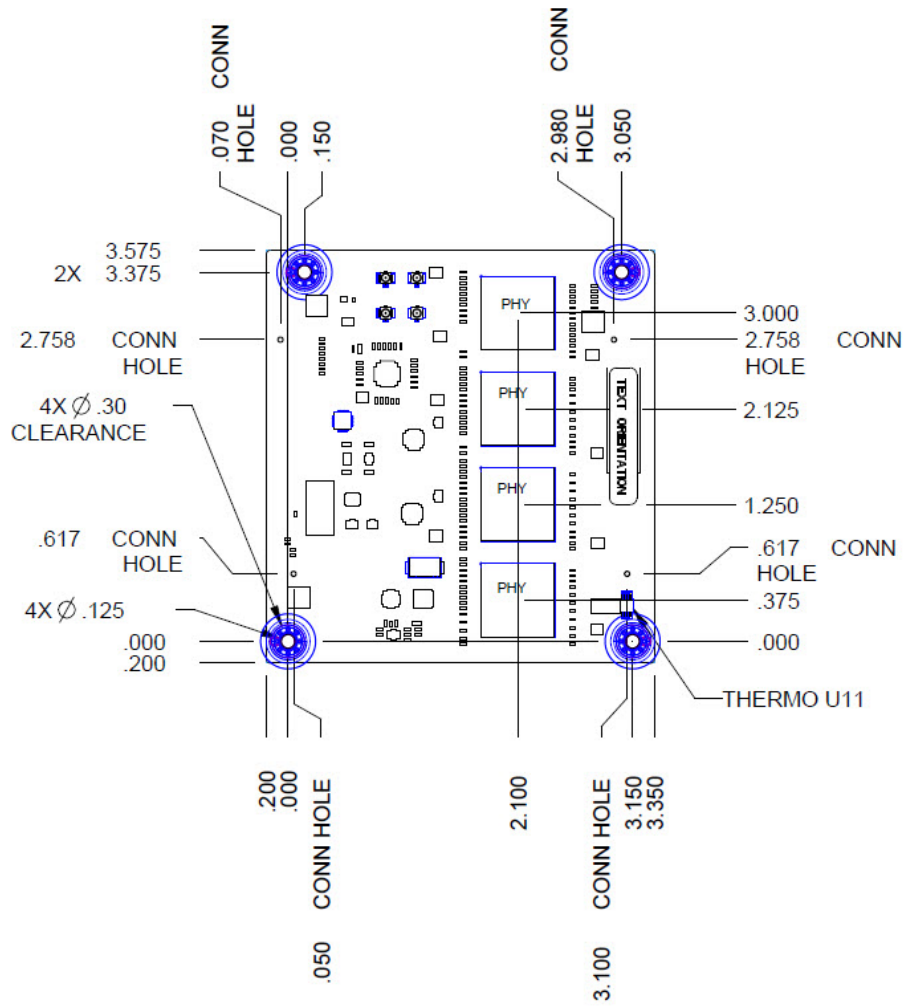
ESS-3300-24T-NCP-E (Expansion Board Without Cooling Plate)
